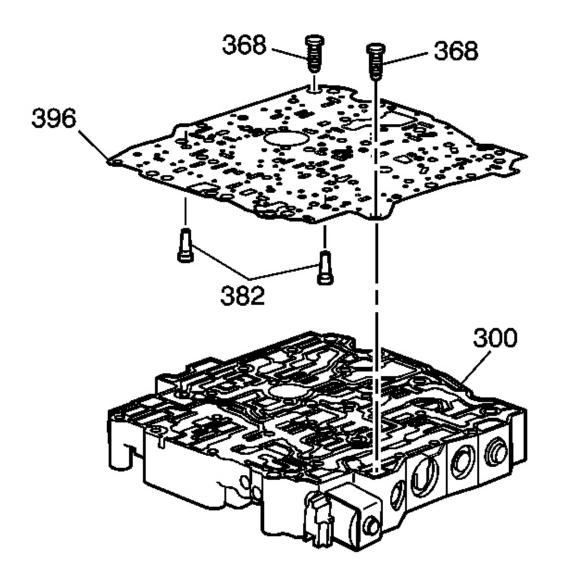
Locating Screen/Seal Assemblies And Spacer Plate Courtesy of GENERAL MOTORS CORP.
